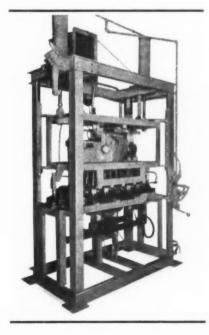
A Multi-Hydromatic Type Welding Machine which Makes 127 Welds in Fifteen Seconds in Assembling Panels and Floors for Automobile Bodies additional angles resting on and welded to the end channels of the bottom of the main frame. The mounting of the machine is such that it can be elevated so that work can be placed under it, and it can also be removed when occasion requires. The hook on the top left-hand side of the frame holds the machine up when not in use. The entire framework is given ample strength and rigidity by the use of additional lengths of angles and channels. This multiplicity of parts becomes one integral piece of steel when welded together.
